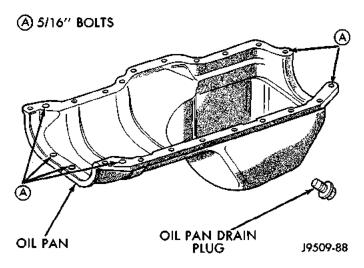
Position of 5/16 inch Oil Pan Bolts
